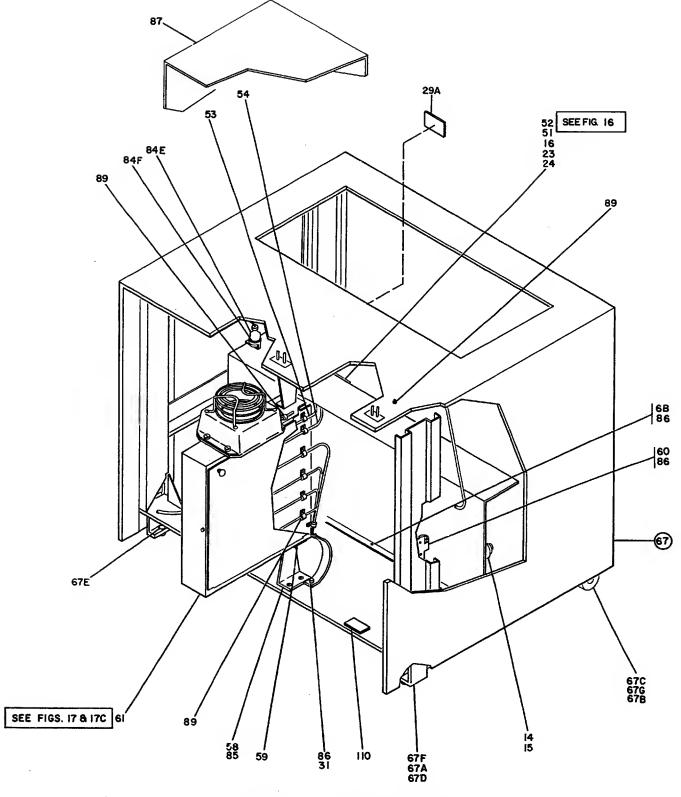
2311 DISK STORAGE DRIVE FINAL ASSEMBLY. SHEET 2 OF 2. SEE LIST 1.
